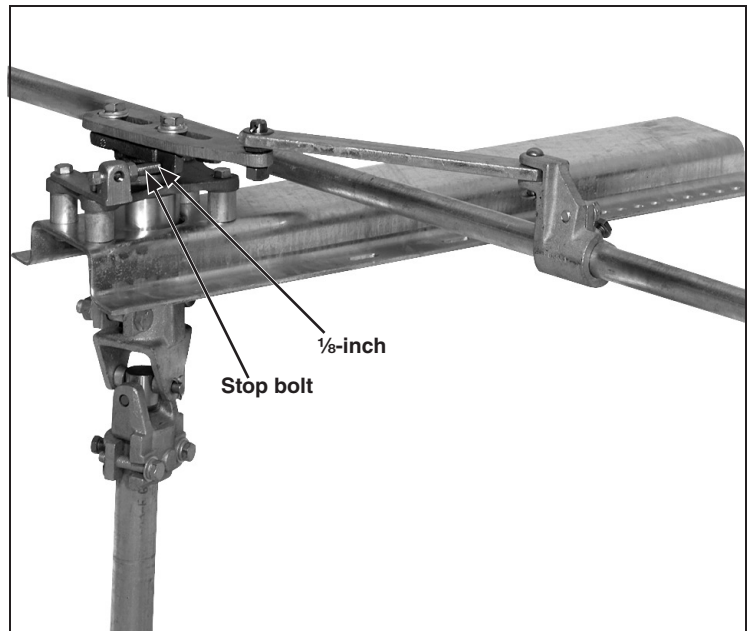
Adjust the outboard bearing crank-arm stop bolt for power operation.
